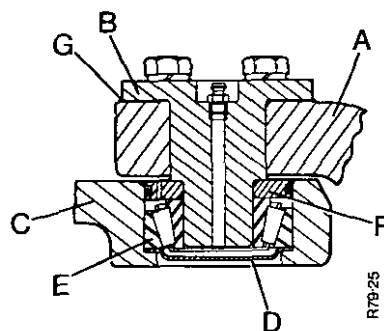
TOP BEARING PIN ARRANGEMENT
